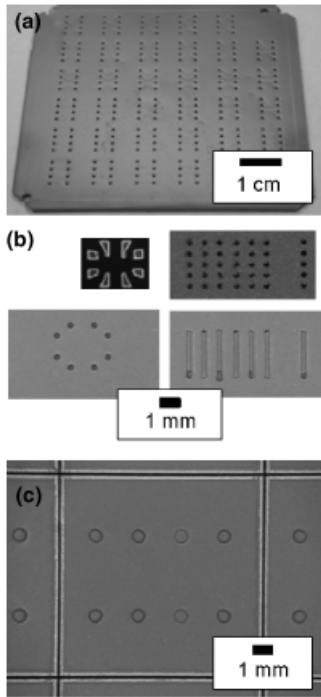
(a) Interposer array; (b) silicon access holes (above) and mating interposer holes (below); (c) laser-scribed interposer.
